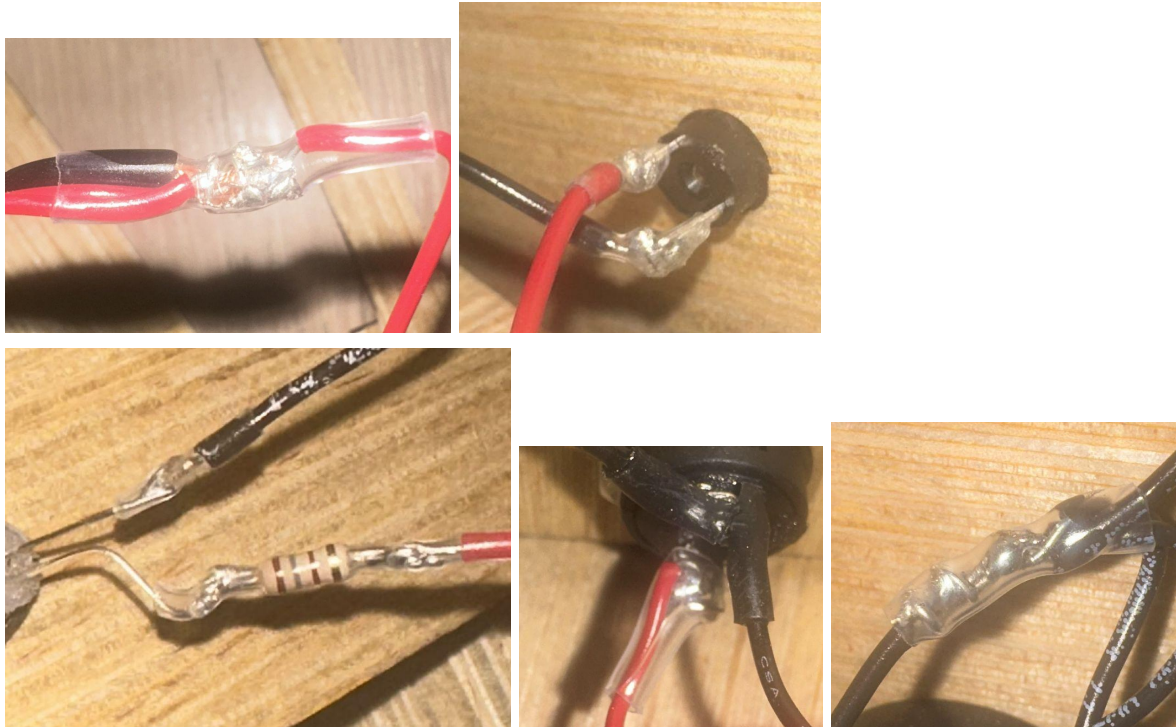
shows the close-up views of soldered connections and splices with heat-shrink sleeving. These joints illustrate compliance with IPC J-STD-001 requirements for solder integrity and insulation [2]
